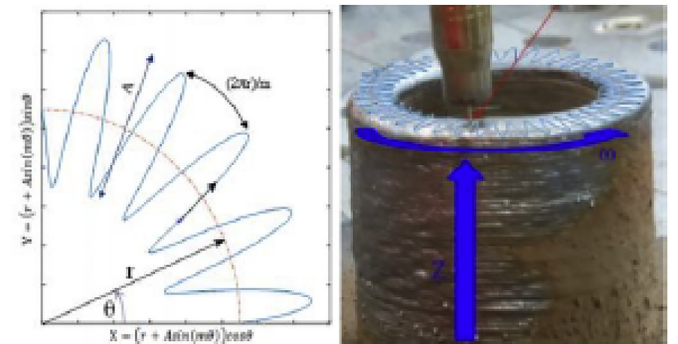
Tool path for asymmetric parts and deposited cylinder [86]
